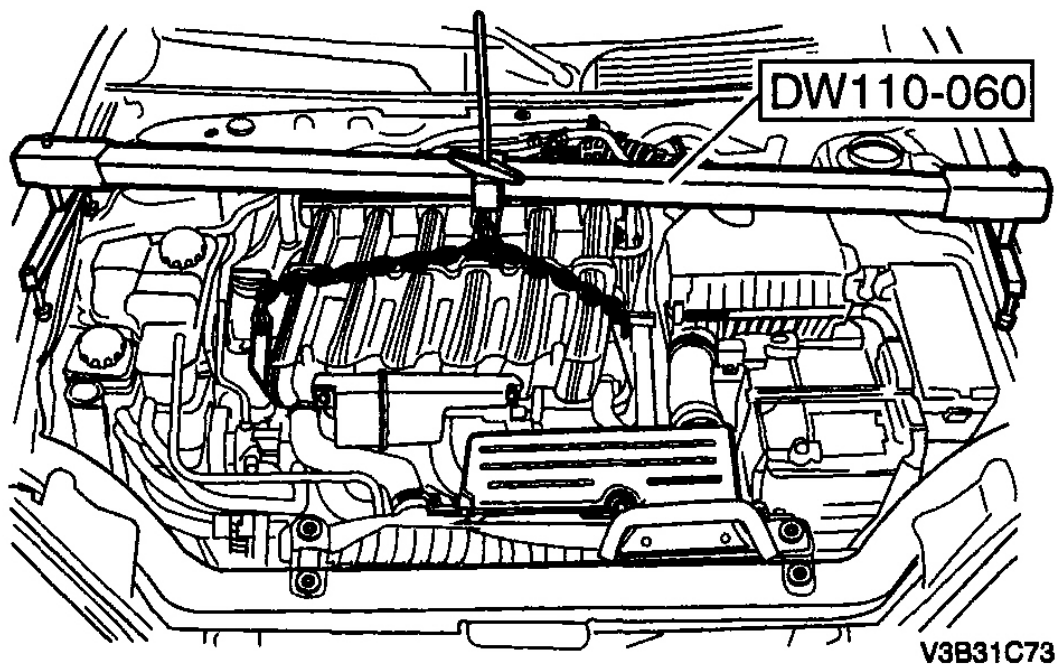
Supporting Engine And Transaxle Assembly Using Engine Assembly Lift Support DW110-060
